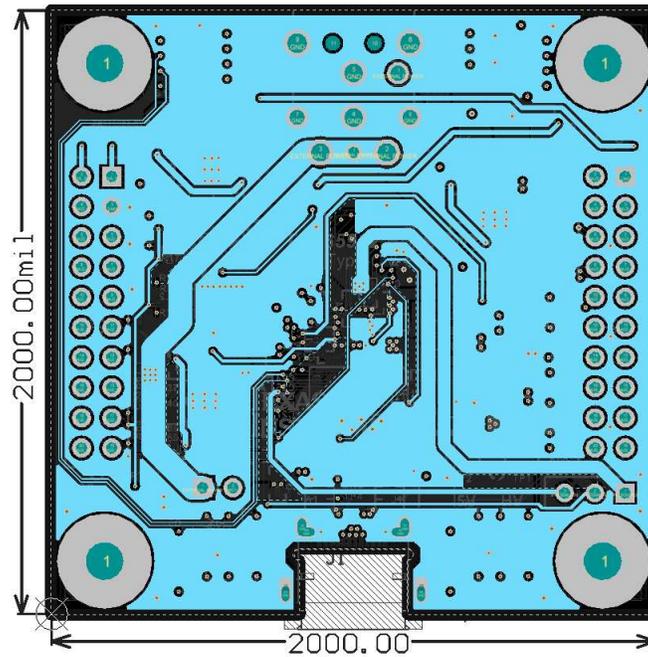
PCB Layer 5 (Inner Signal Layer 2)
